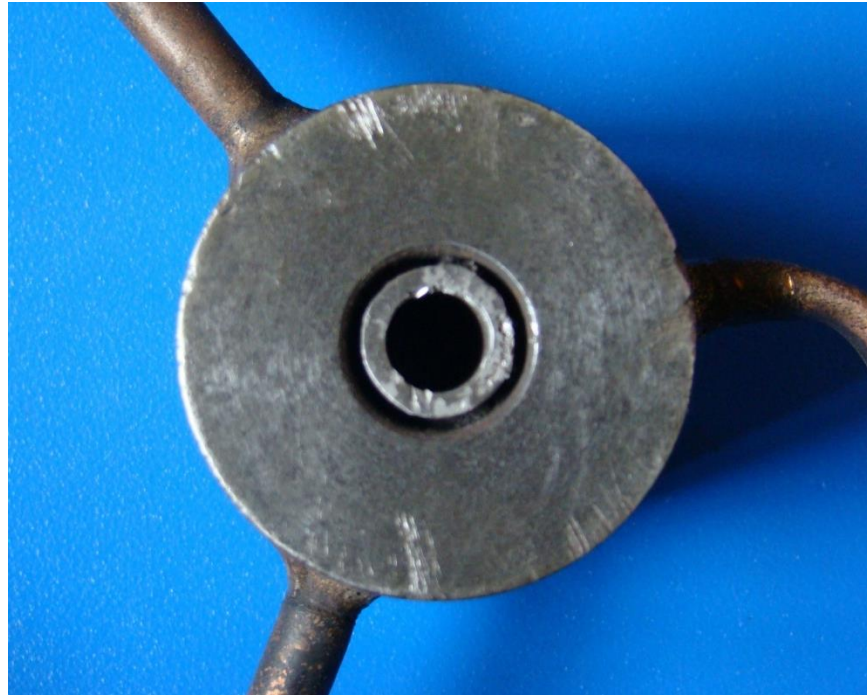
Photograph of atomizer used in spray deposition technique.
